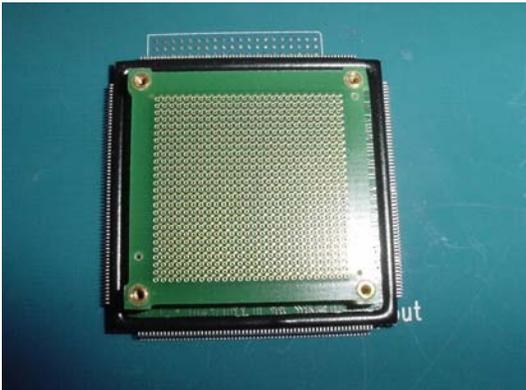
Assembly step 1- solder adapter board bottom to PCB
